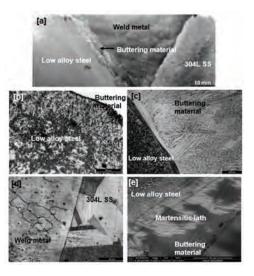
Dissimilar metal welded joint (a) macro image, (b) and (c) interface between LAS and buttering material, (d) interface between weld metal and 304L SS and (e) lath martensite near fusion boundary
